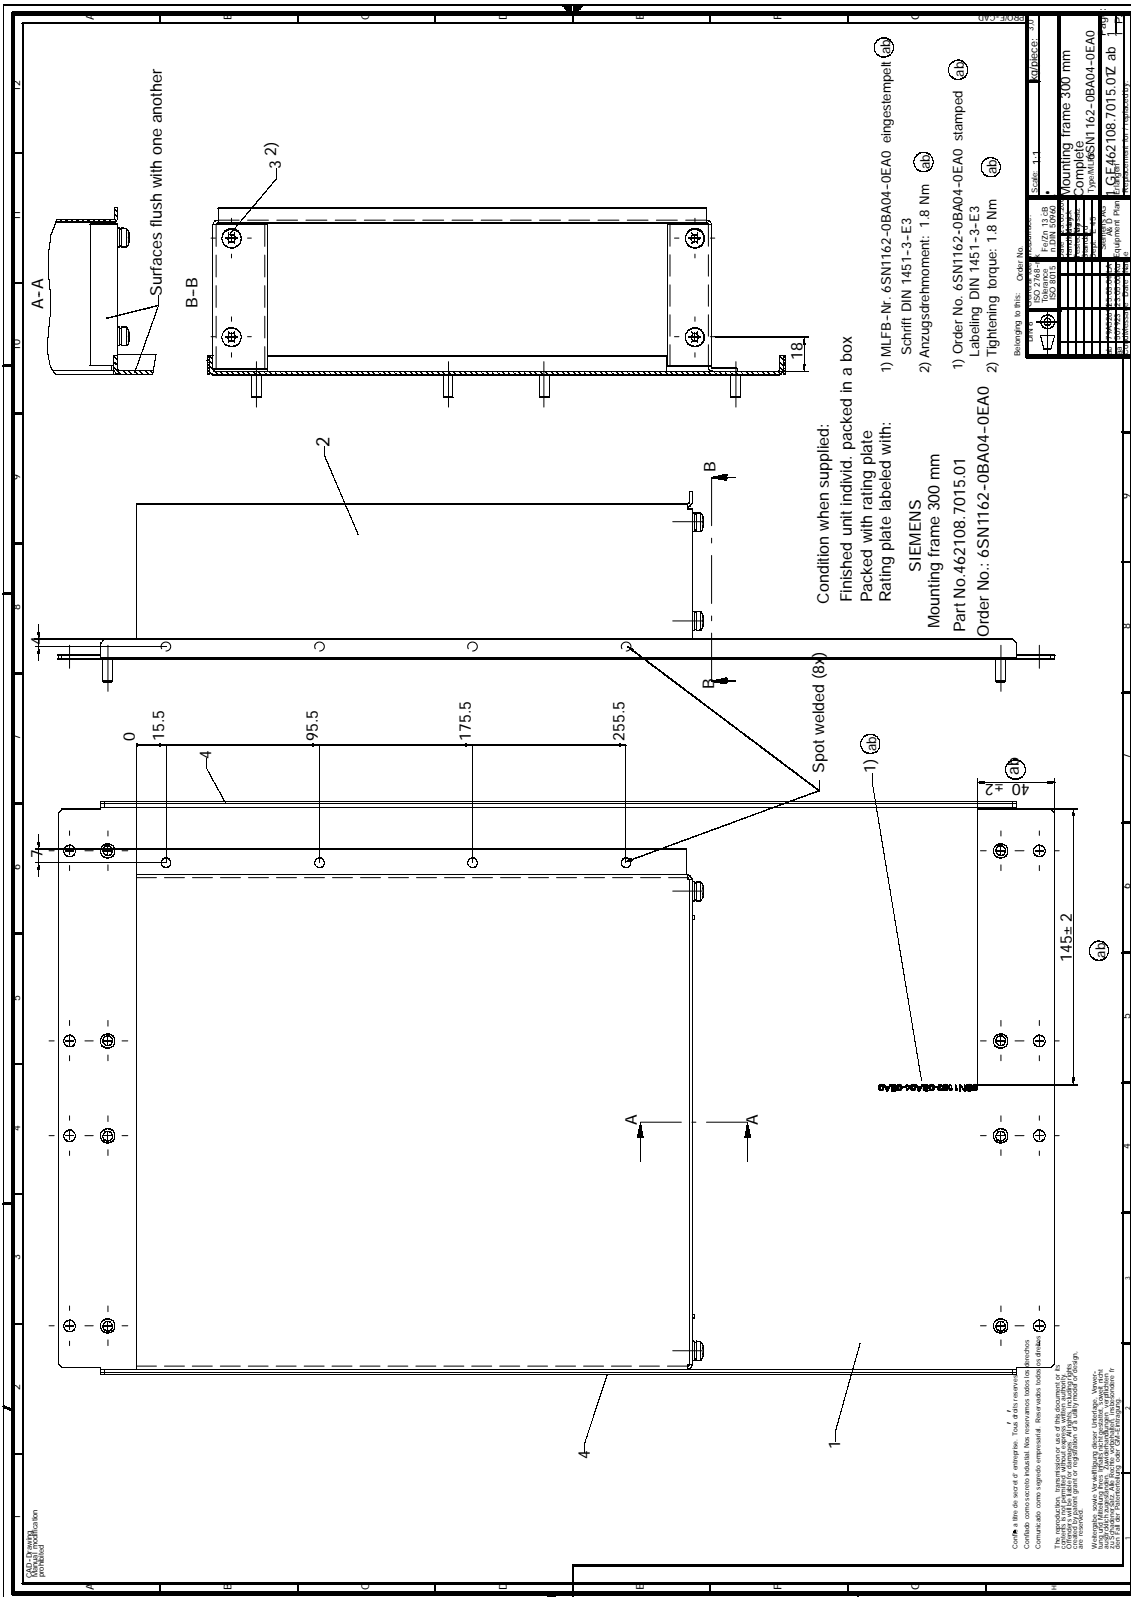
External cooling, mounting frame for cabinet installation module width 300 mm, 6SN1162-0BA04-0EAO
